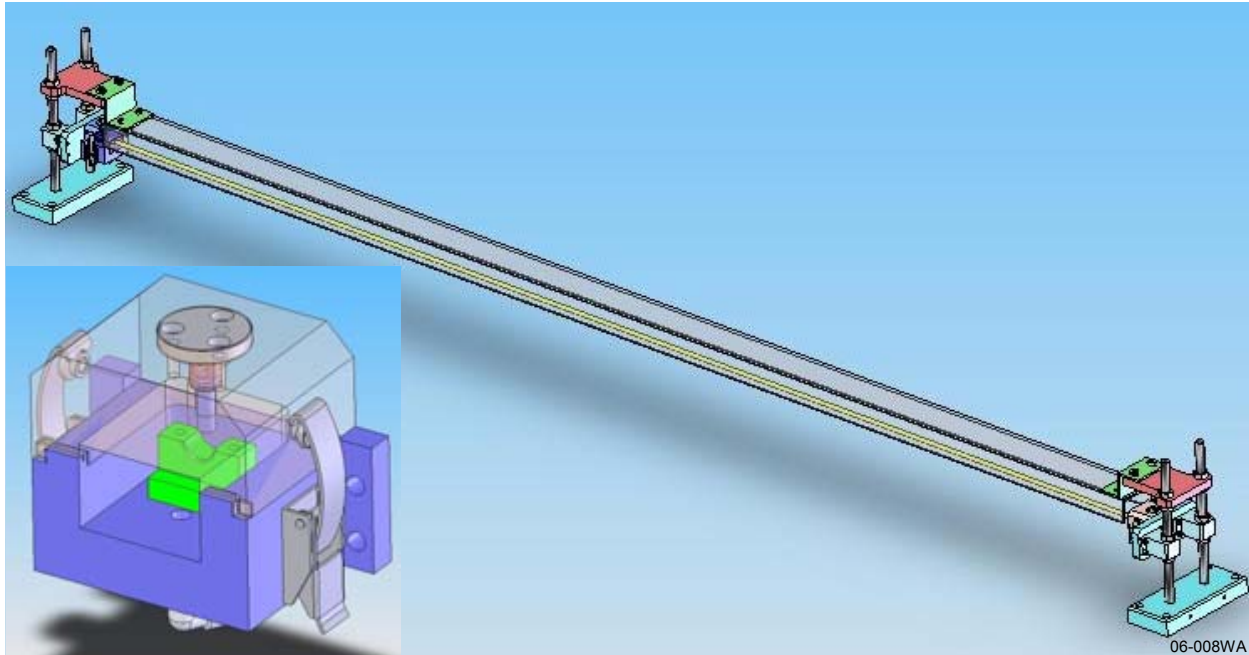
Improved xenon lamp mount assembly; inset shows the quick-release lamp contact housing with spring-loaded lamp contact.
